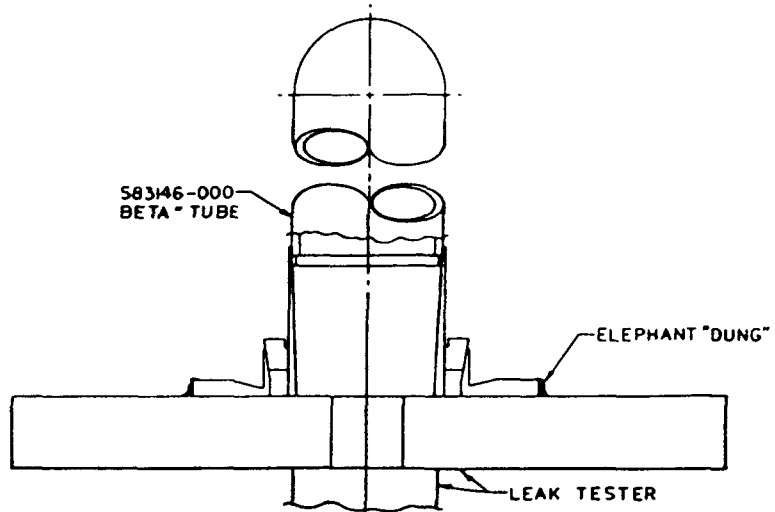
(HEADER AND TUBE ASSEMBLY LEAK TEST)
